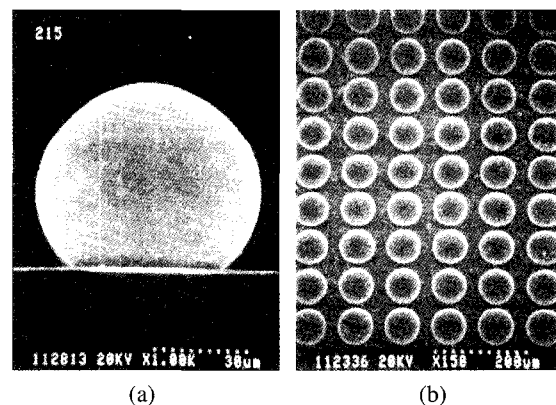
SEM showing eutectic solder bump with 40µm diameter/100µm pitch after reflow (a) Cross section (b) Plane surface
